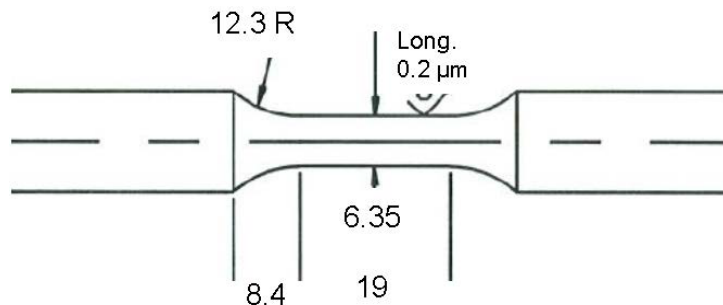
Fatigue specimen gage section, with dimensions in mm.
